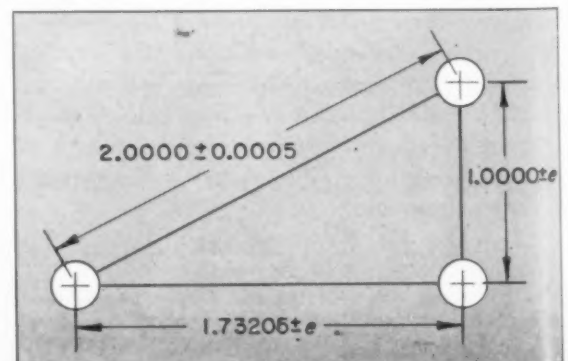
Dimension and tolerance symbols for right triangle.
